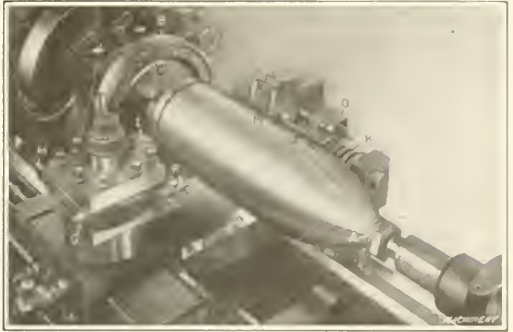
Set-up on a 24-inch Engine Lathe for machining Band Groove and cutting Wave Ribs
